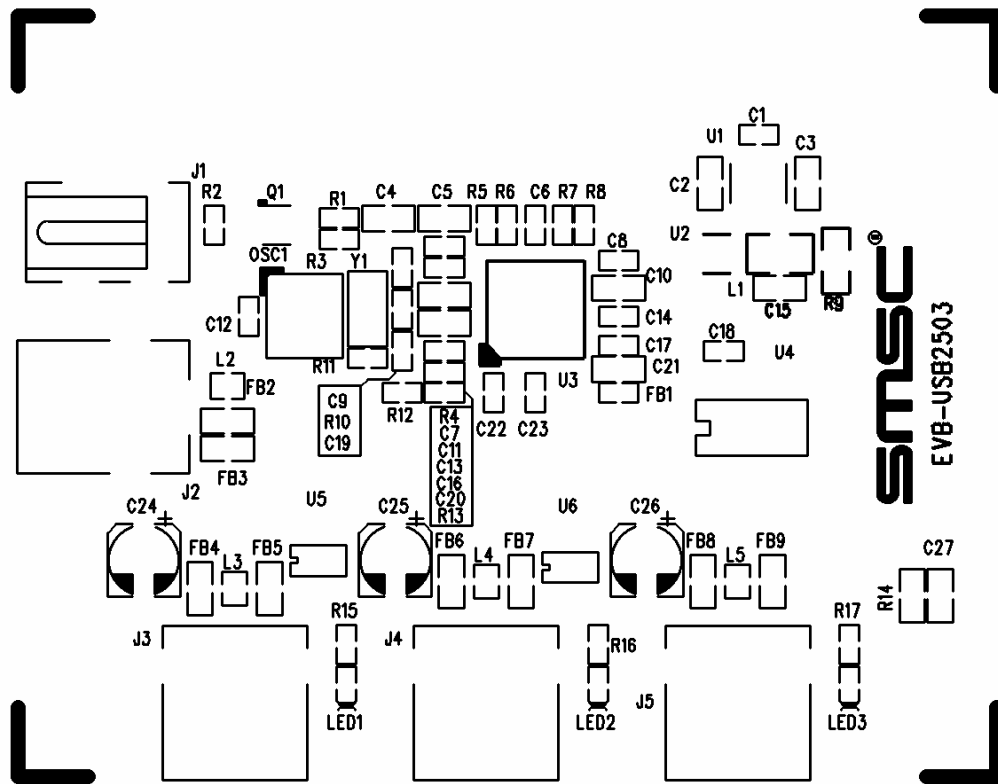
Silk screen of EVB-USB2503 PCB.
